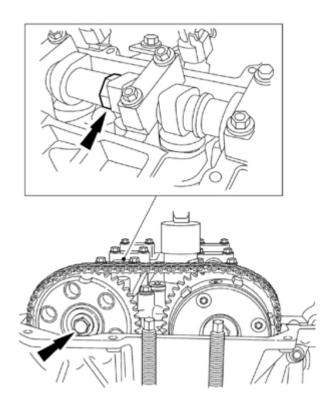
Locating Exhaust Camshaft Drive Gear And Bolt Courtesy of FORD MOTOR CO.
